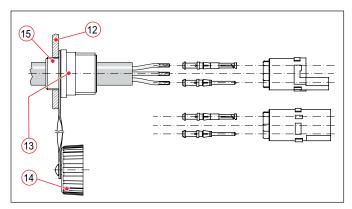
Example of assembly for receptacles with thread on a mounting wall (applies also for plugs with thread)
